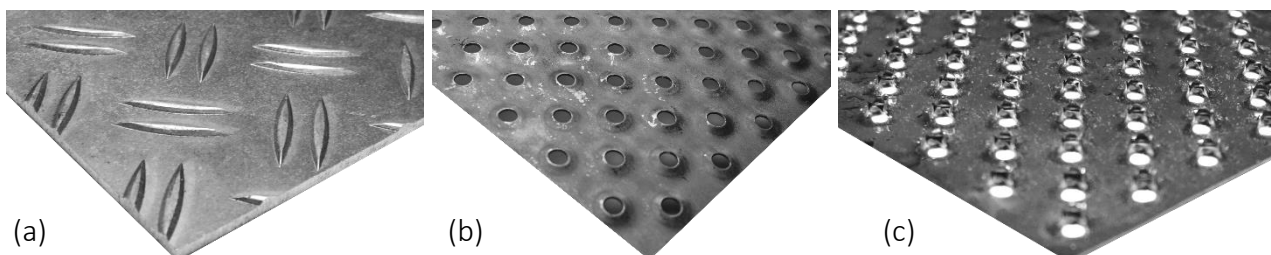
Sheet metals: (a) chequer plate (b) perforated sheet metal 1 (c) perforated sheet metal 2.
